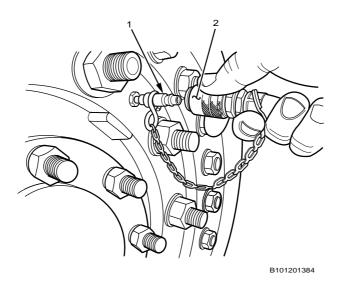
Tire Inflator Hose-to-Valve Stem Fitting Connection.
